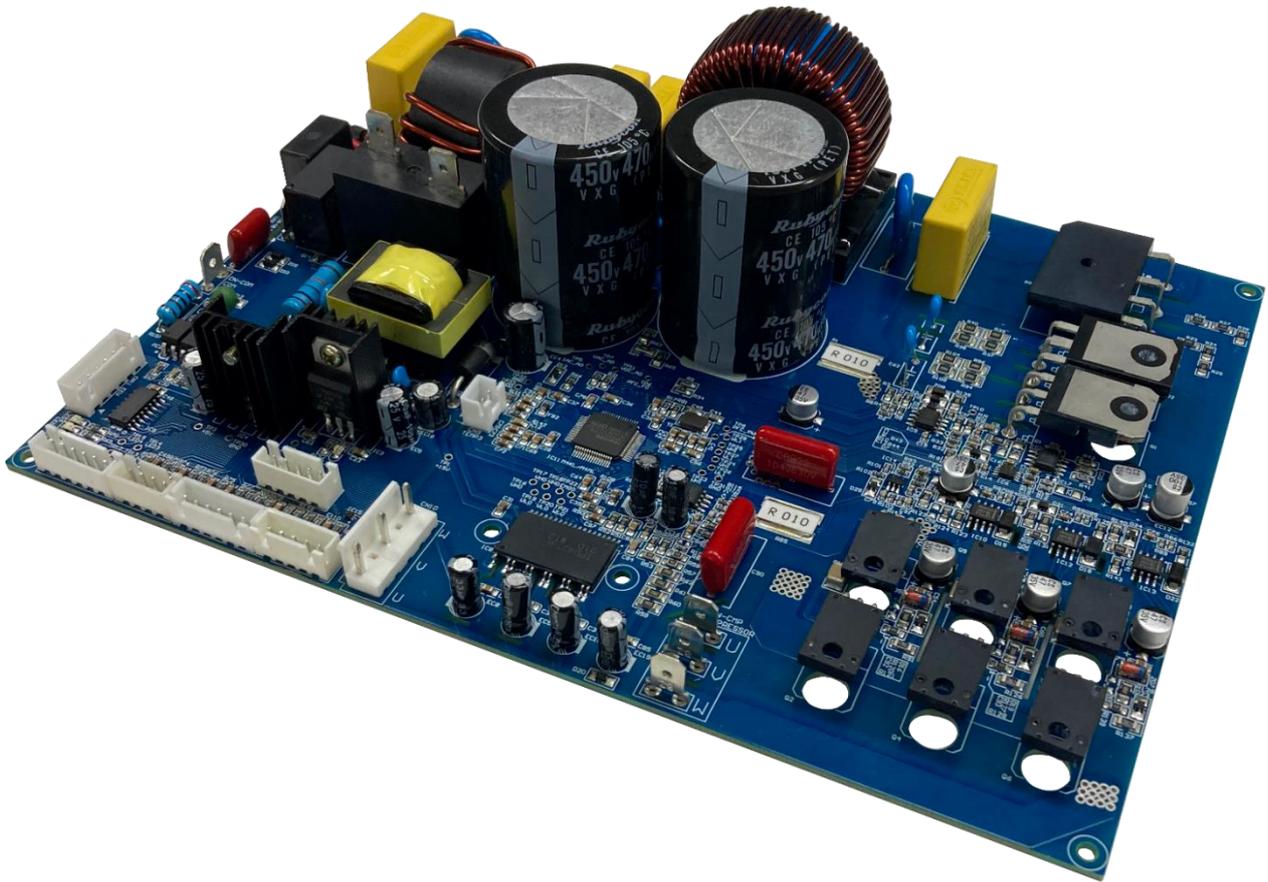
Side View of the Air conditioner Outdoor Unit Circuit Board
